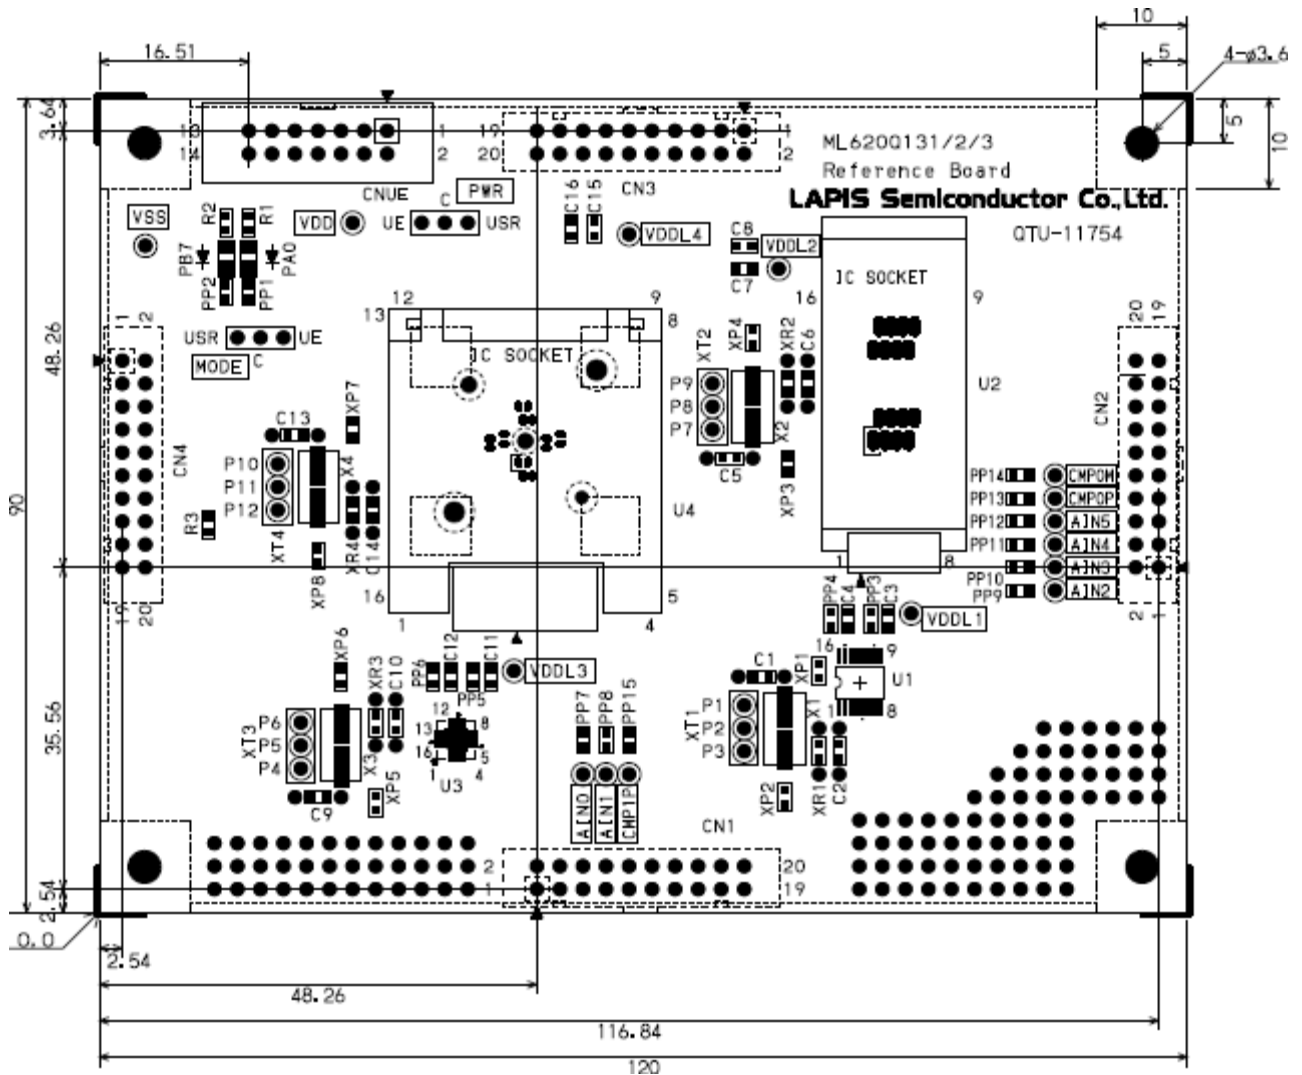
Reference Board PCB dimensional outline drawing and layout of components (ML620Q131/132/133 Reference Board) (Top view)
